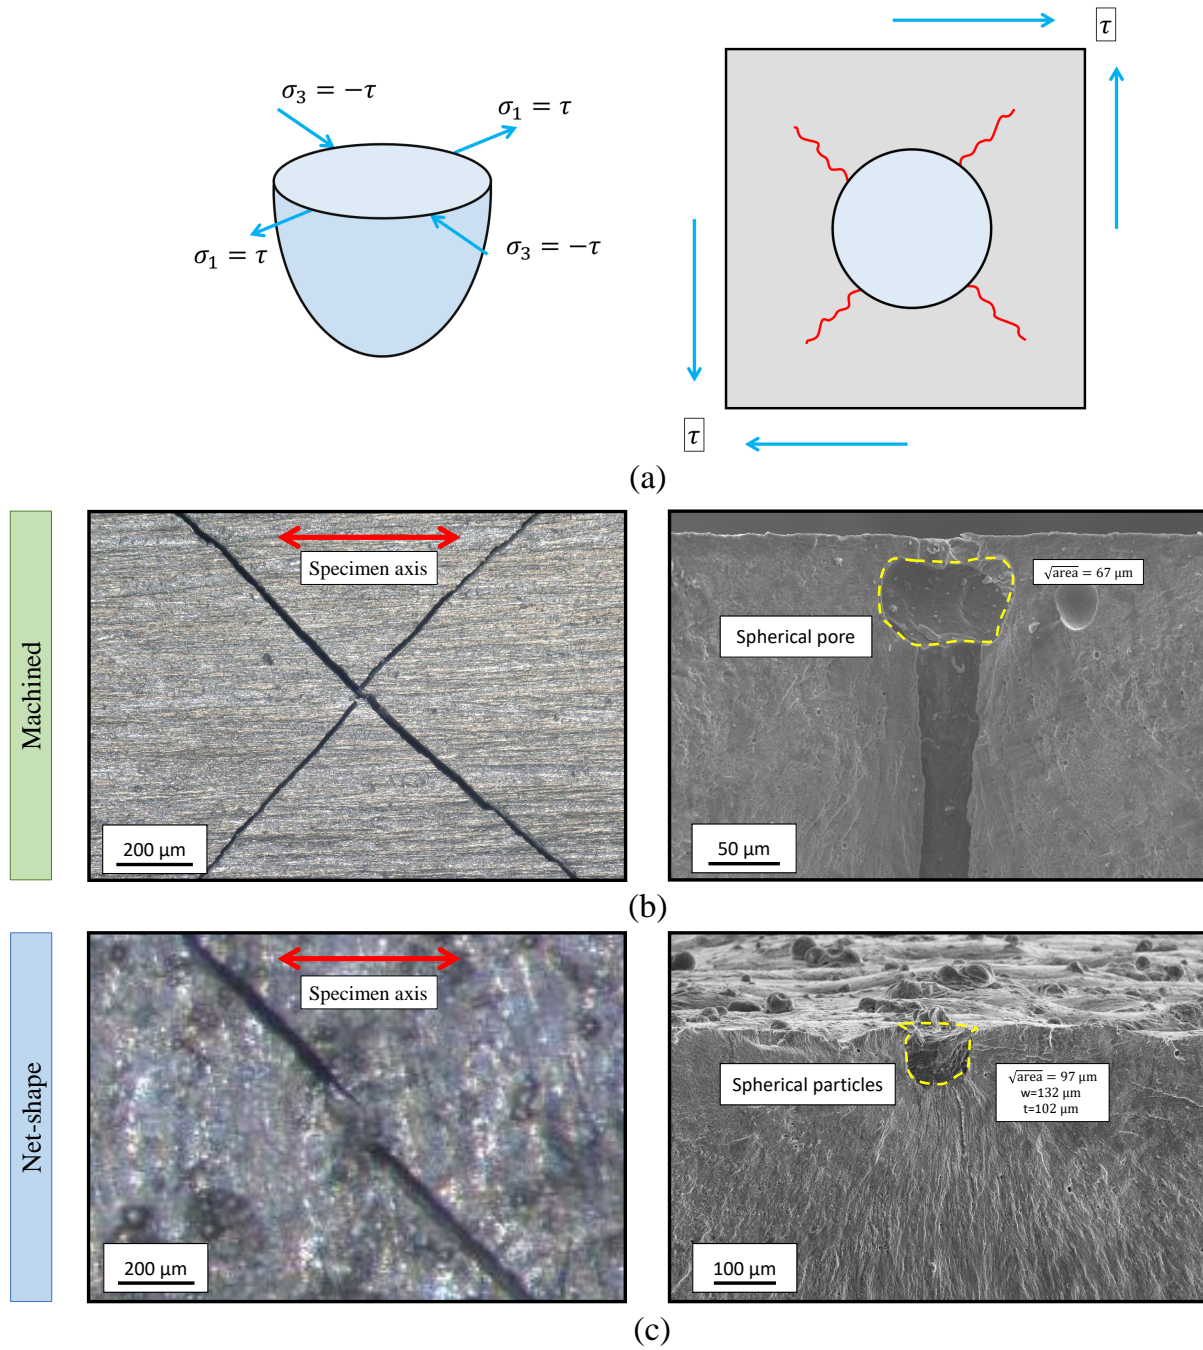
Failure mechanisms of fatigue cracks under torsional loading in case of spherical defects: a) schematic of the mechanism; b) example of a machined specimen failed due to a spherical pore and c) example of a net-shape specimen failed due to a SPP.
